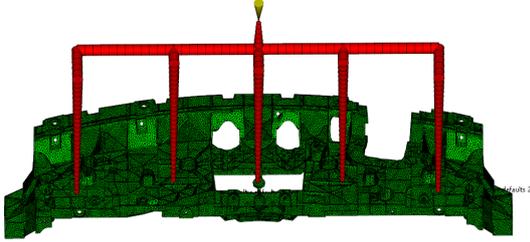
Gating system of the upper bracket of automobile front-end frame
